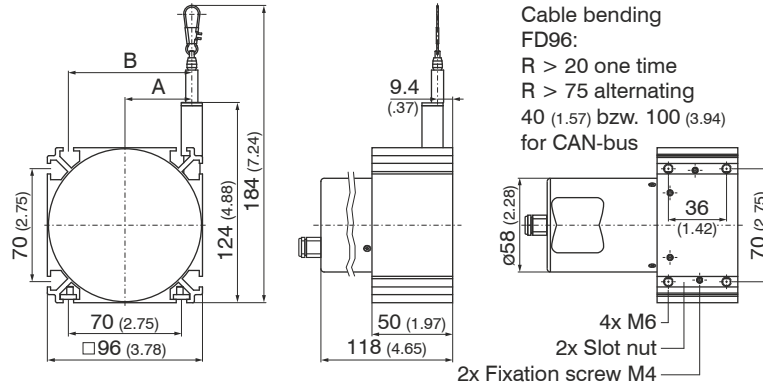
Dimensional drawing ... - FD96 - CA - P, dimensions in mm (inches), not to scale
